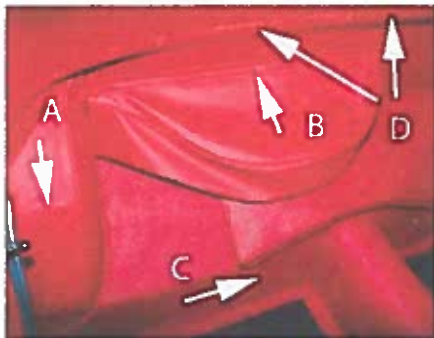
A jute felt pad to cushion the folded hood bows goes under the wheel arch cover on the "flat" (A). The top edge flap of the wheel cover is glued to the flange and bulkhead above the wheel opening. Three "Speedy" rivets (B) are also used to attach the second stitched flap along the top edge. These have a flat base, push-on caps, and are compressed using a buck from underneath and hammer and flat ended drift from above. The heads are painted black. Lift-The-Dot studs (C) are used for the battery door hold-down straps (not yet installed here). The flap along the top edge of the upper Armacord piece is glued and trimmed flush with the front edge of the rear shroud (D). It will be hidden by the aluminum cockpit molding. This photo is of a Reno Red BN2 with Red trim. Note Armacord covering on the drive shaft tunnel.
